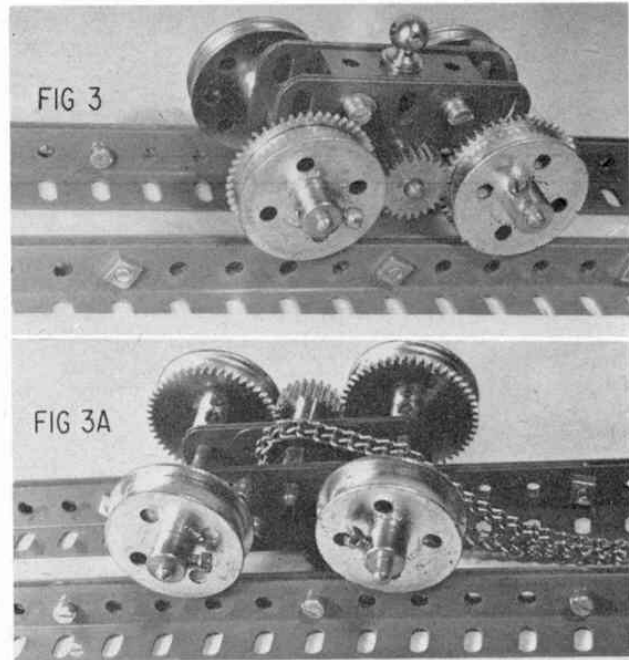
Dragline bogey truck with double flanged wheels and flat-topped rail. Handrail Support at top forms lower part of "Ball and Socket" joint with Socket Couplings attached to superstructure.
